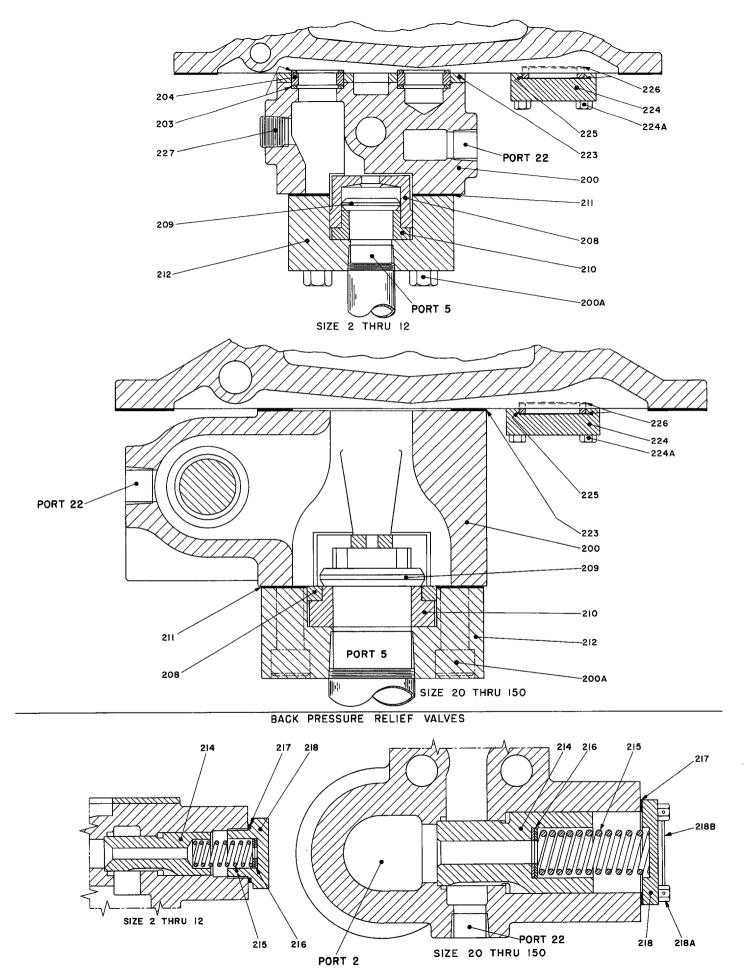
Parts Drawing, One-Way Suction and Return Valve. DS-947913 (504365).
